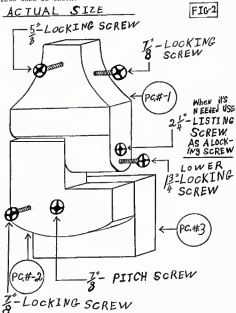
Shows how PC# 1,2 and 3 are fastened together. Note: Line the bottom of PC#2 up with the guide line on PC# 3. Then drill a center hole completely through both pieces and fasten the two together with a 7/8" long drywall screw.
